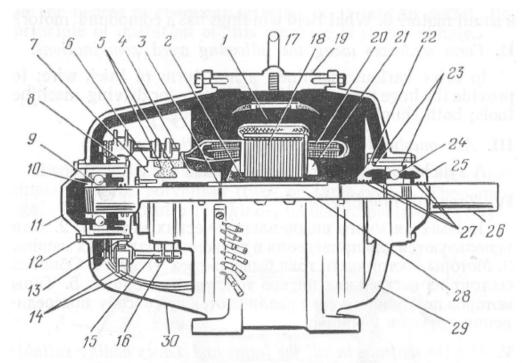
A Ball-Bearing Fully - Enclosed Fan-Cooled Direct-Current Motor
